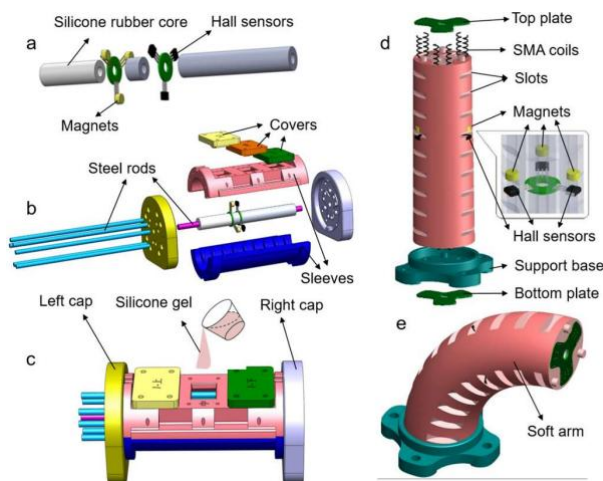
Soft arm fabrication and construction. (a) A silicone rubber core holds the linear Hall sensors and related magnets in place; (b) a larger picture of the 3D-printed soft arm mold reveals the six steel rods that serve as the holes for the SMA coils; (c) silicone gel is poured into the mold to create the soft arm; (d) the SMA coils, plates, and support base are put together on the soft arm's body; and (e) the soft arm is bent. [16].
